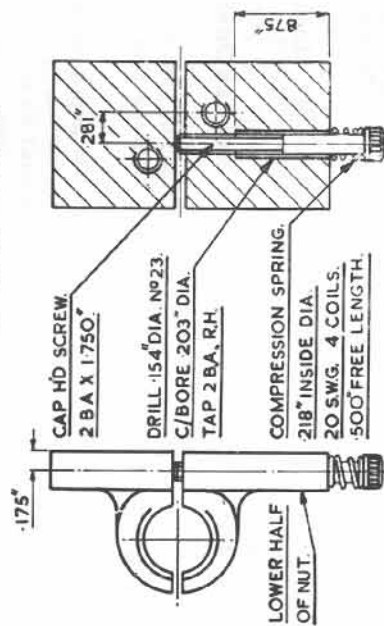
Diagram showing stop screw and spring fitted to lead screw nut.
